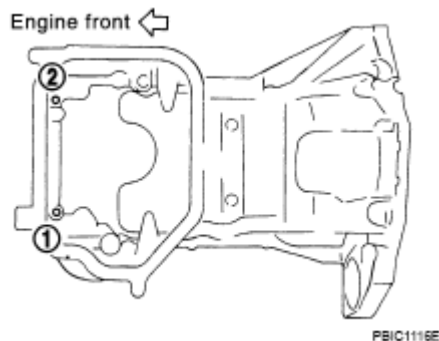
Identifying Two Mounting Bolts In Front Of Oil Pan (Upper)
